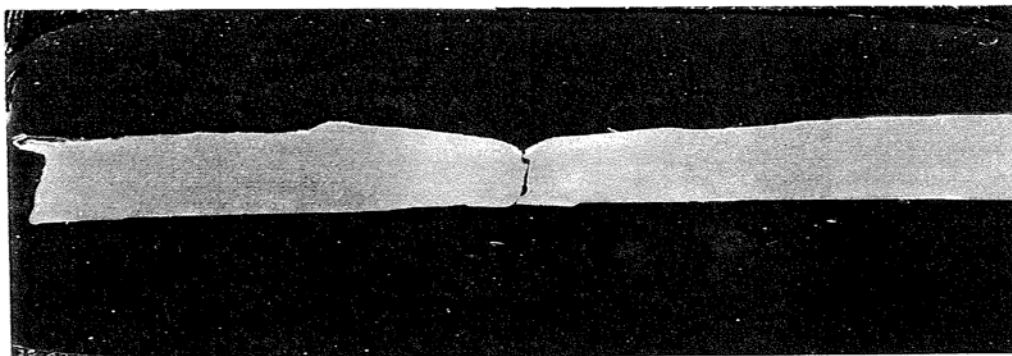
Selective Seam Weld Corrosion Case Number 1
